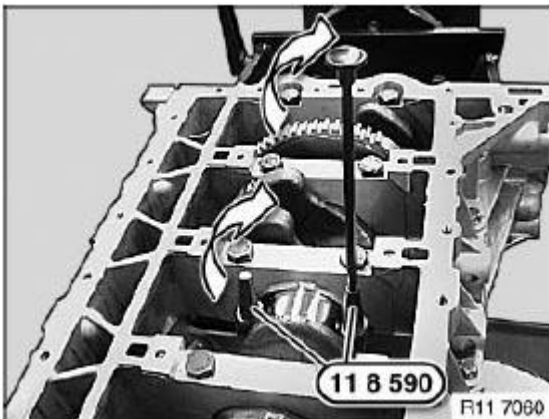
Inserting Special Tool Into Big End Of Connecting Rod
